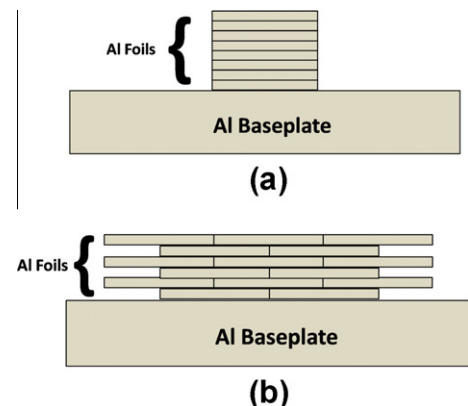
UAM build configurations. (a) “Single tape width” configuration. (b) “Brick wall” configuration.
